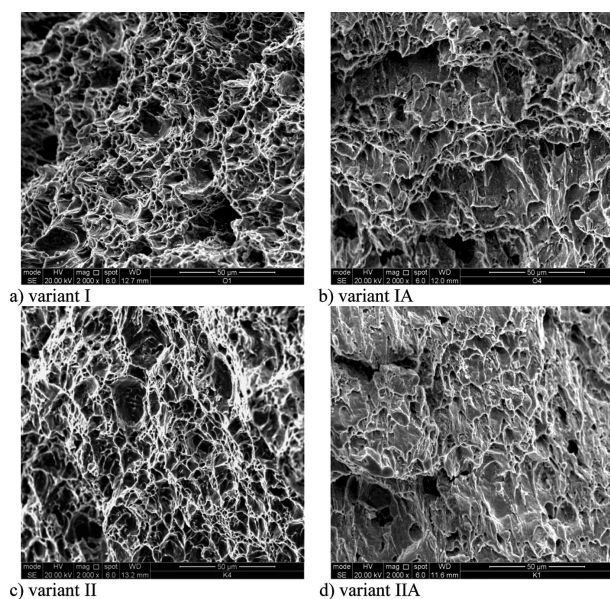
Fracture surfaces of impact strength specimens (SEM)
